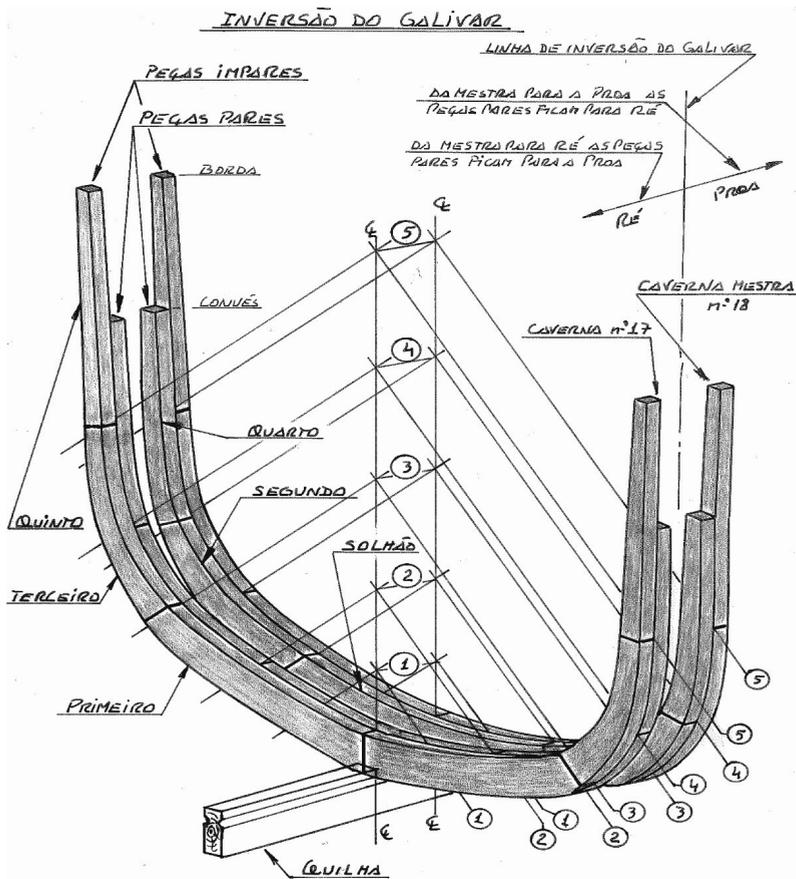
Reversing the position of the even parts with the odd parts in the master frame
